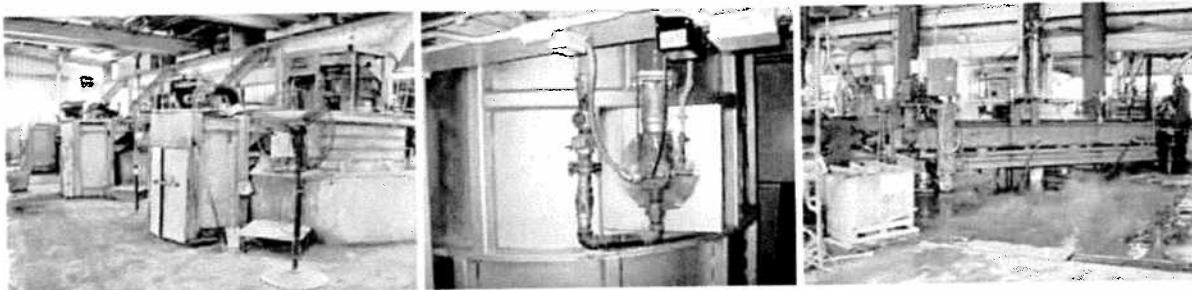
Refining kettles and ducts, gas burner on kettle at GRC, ingot casting machines.
